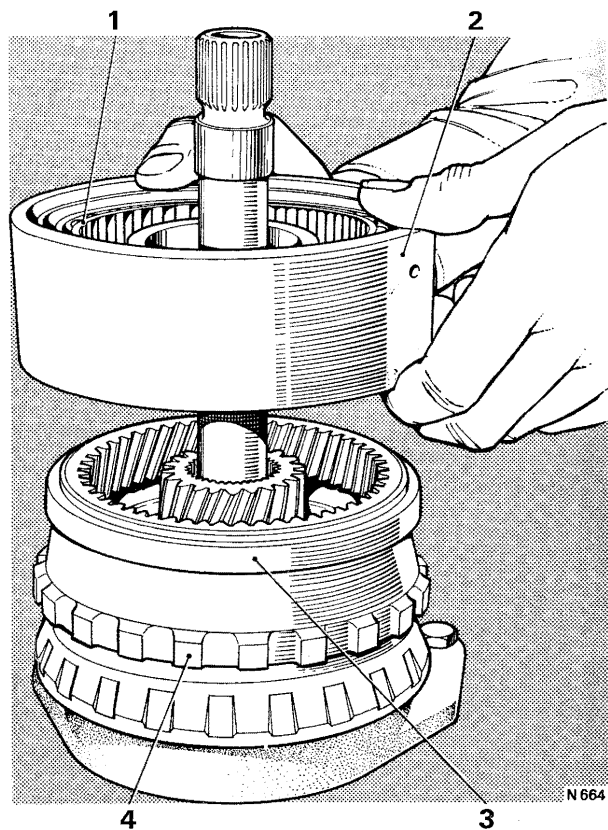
REMOVING THE REACTION CARRIER AND REAR SPRAG ASSEMBLY
